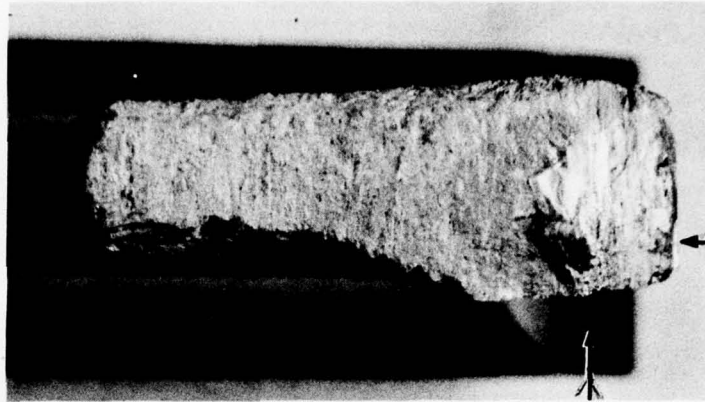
Fracture surface and void - Defect No. LBE122.
